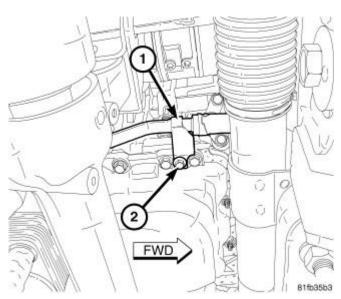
Oil Cooler Line & Bolt Courtesy of CHRYSLER LLC
